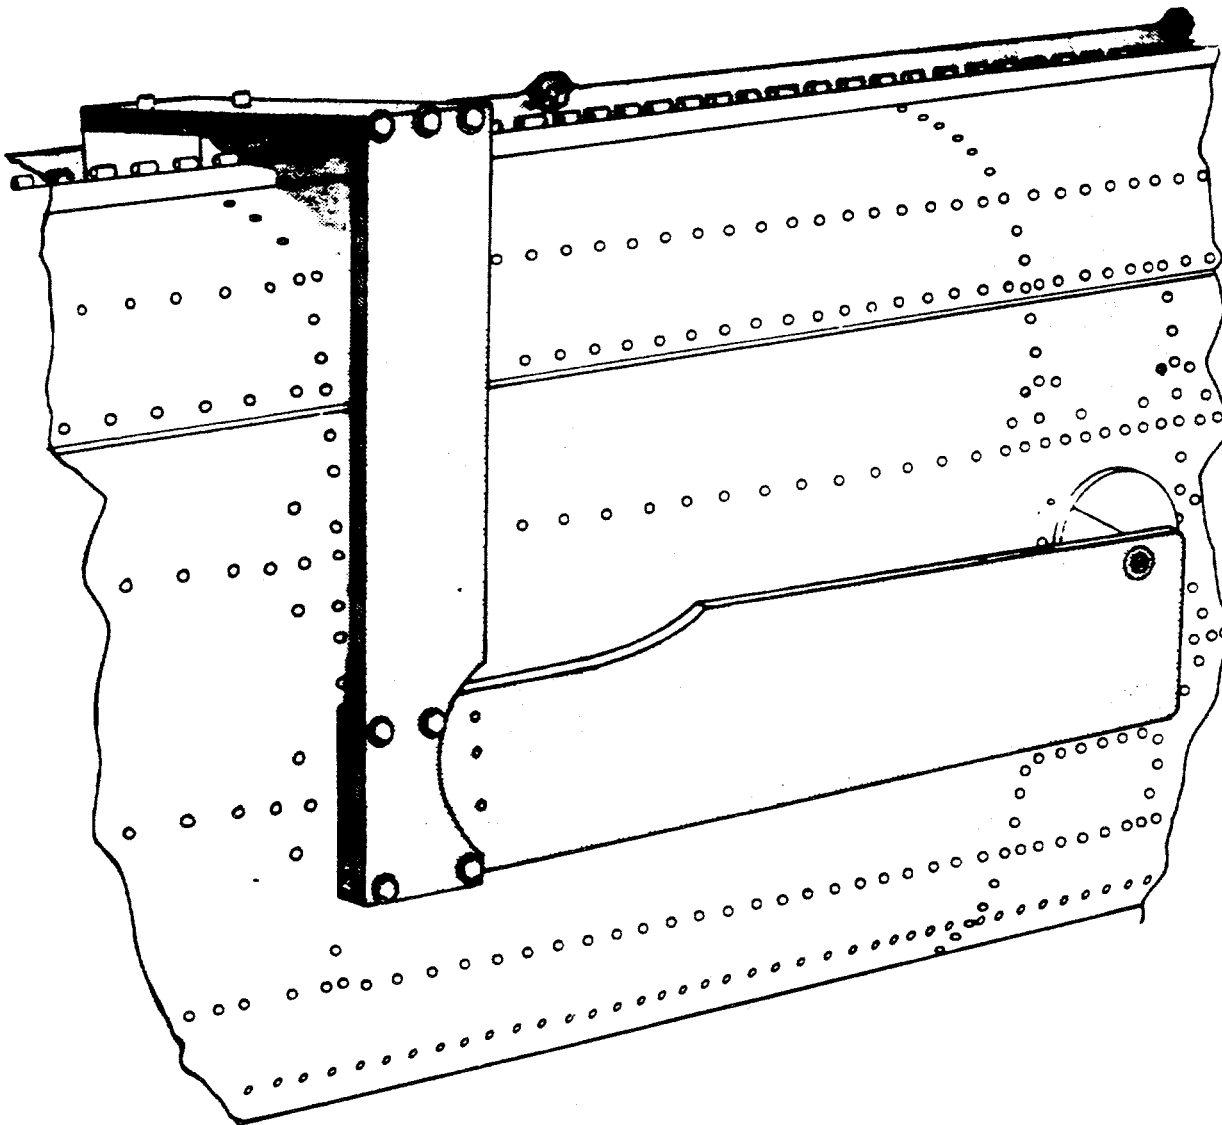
DRILL JIG RIGGING RIVETS TAILBOOM
